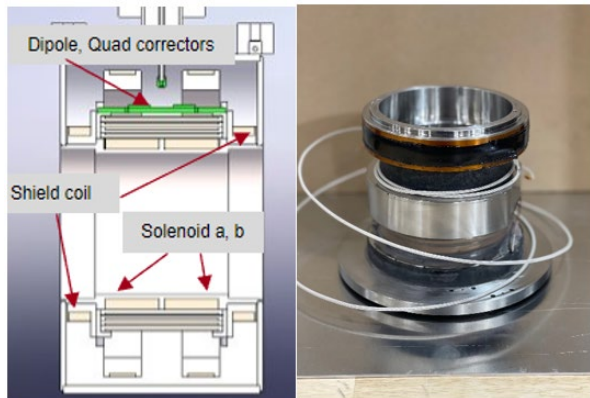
Left: Solenoid package design. Right: Solenoid with shield coils.
